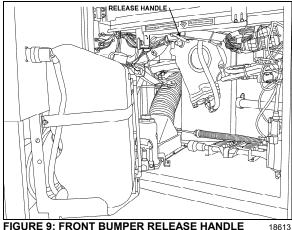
FRONT BUMPER RELEASE HANDLE
